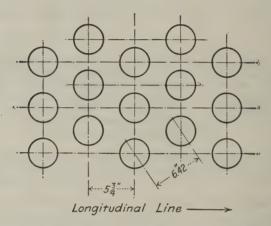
EXAMPLE OF TUBE SPACING WITH TUBE HOLES ON DIAGONAL LINES
